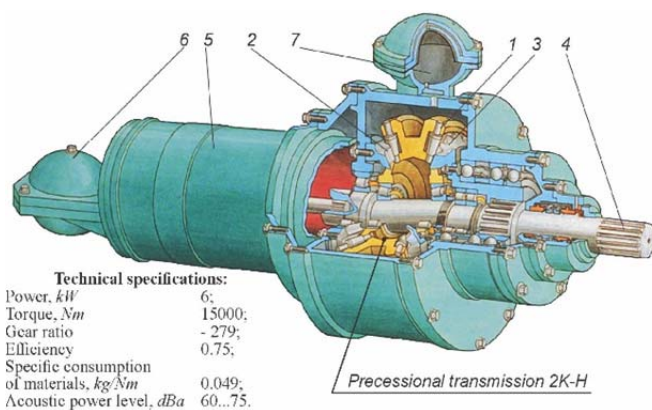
Precessional submersible gearmotor with bolt gear, $i=-279$.
